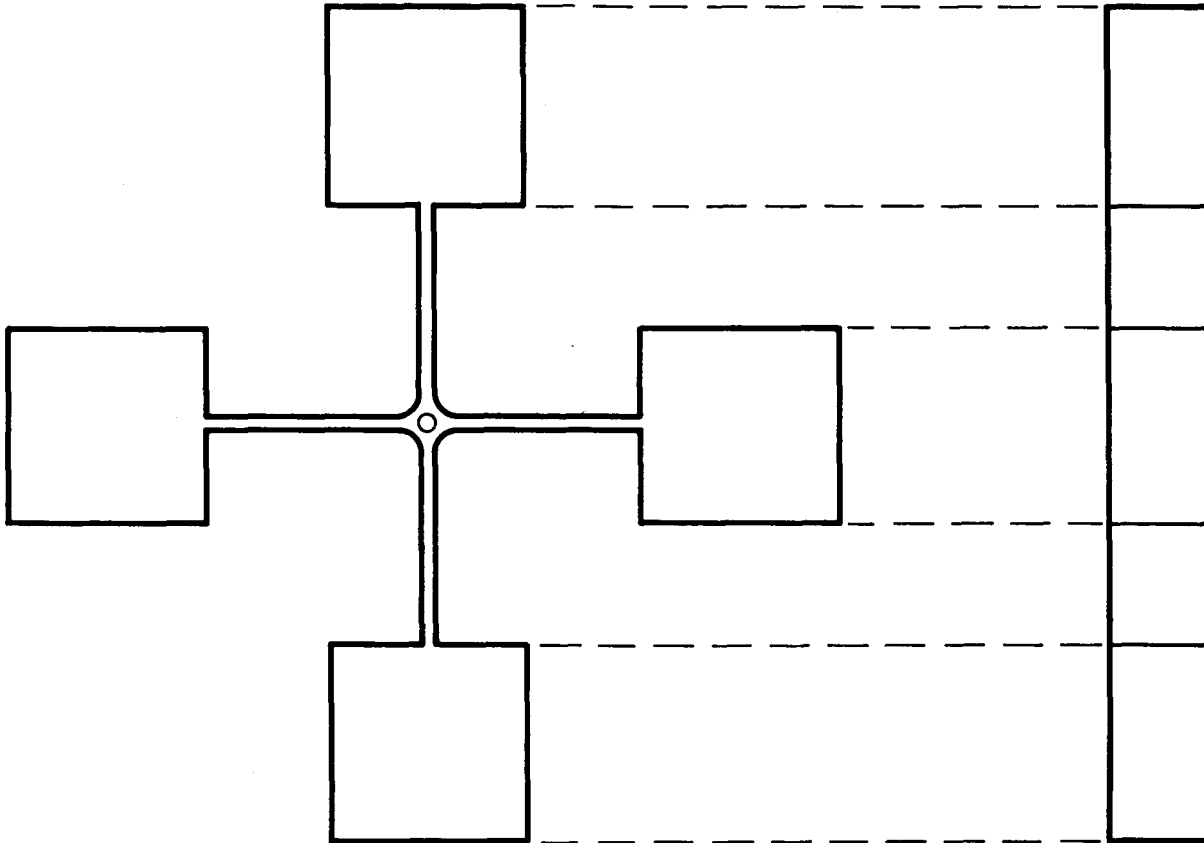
(c). Sensor cruciform (1/4 in. radius).
